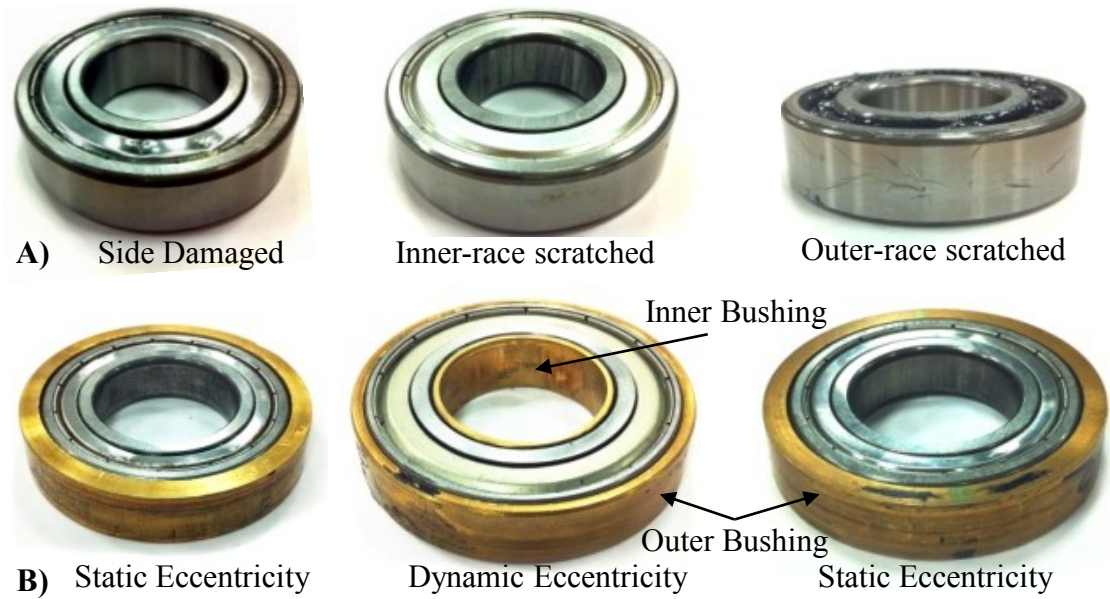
A) Damaged bearings B) Bearings replacements for eccentricity
